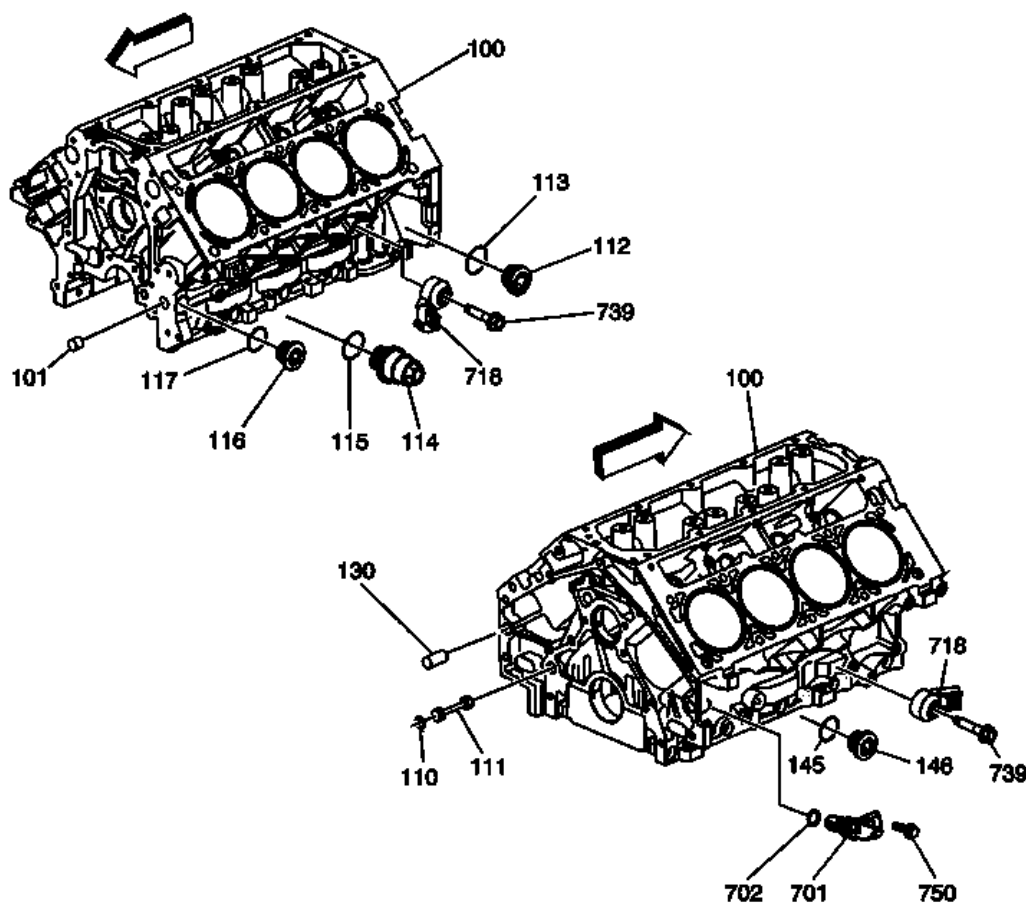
Exploded View Of Engine Block Plugs/Sensors Components
